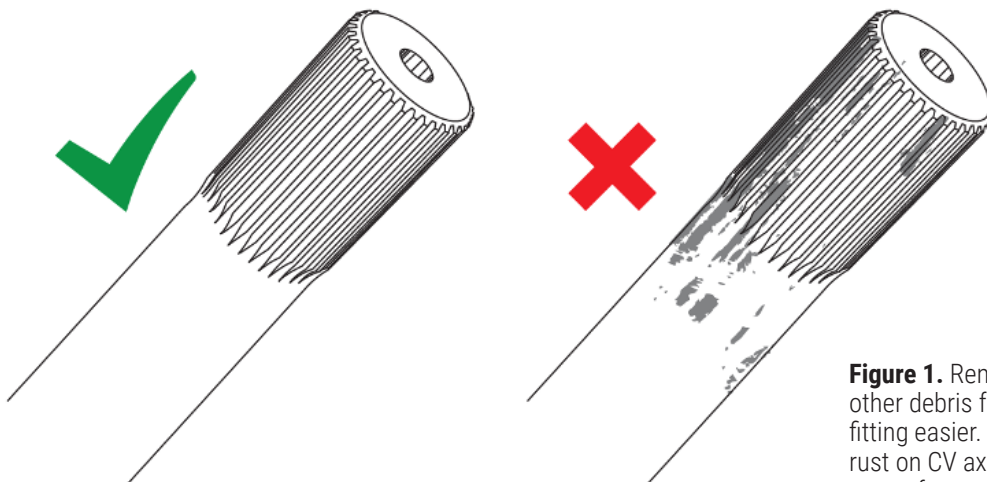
Remove all corrosion, rust, burrs and other debris from mating components to make fitting easier. Even a minor build-up of surface rust on CV axle shaft spline ends may impede ease of reassembly.
